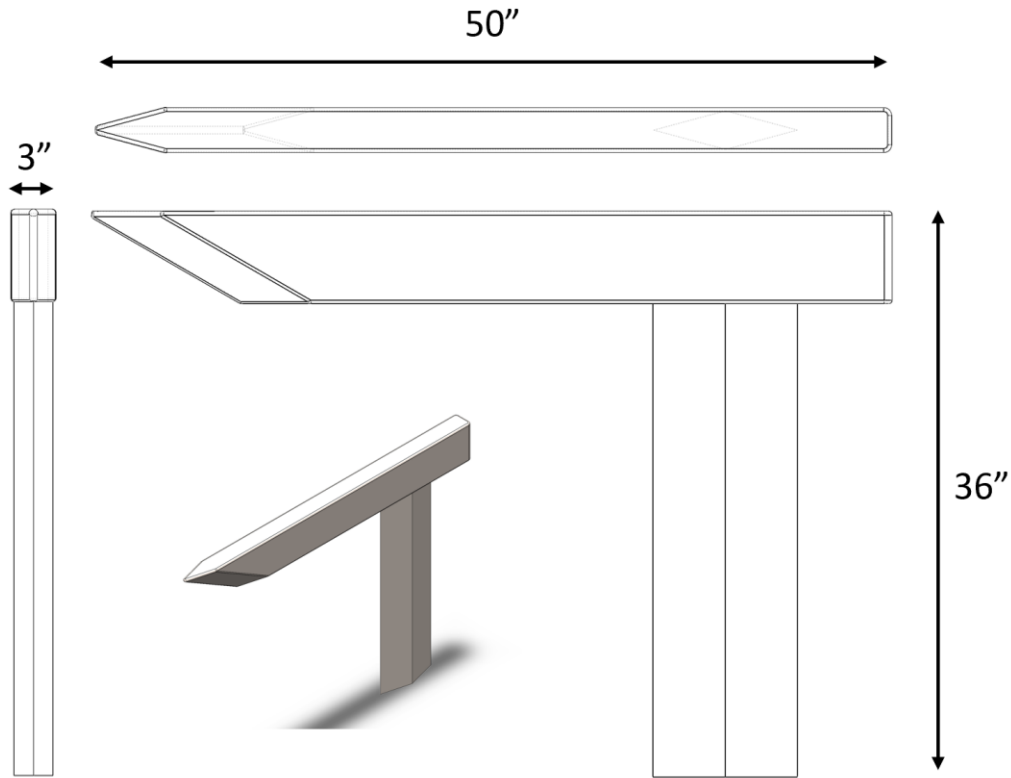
A CAD rendering of the full-scale optical probe with profile dimensions listed.
